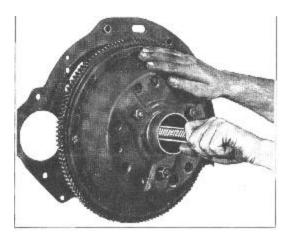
Assembling Clutch to Flywheel—J-384 Clutch Aligning Arbor
